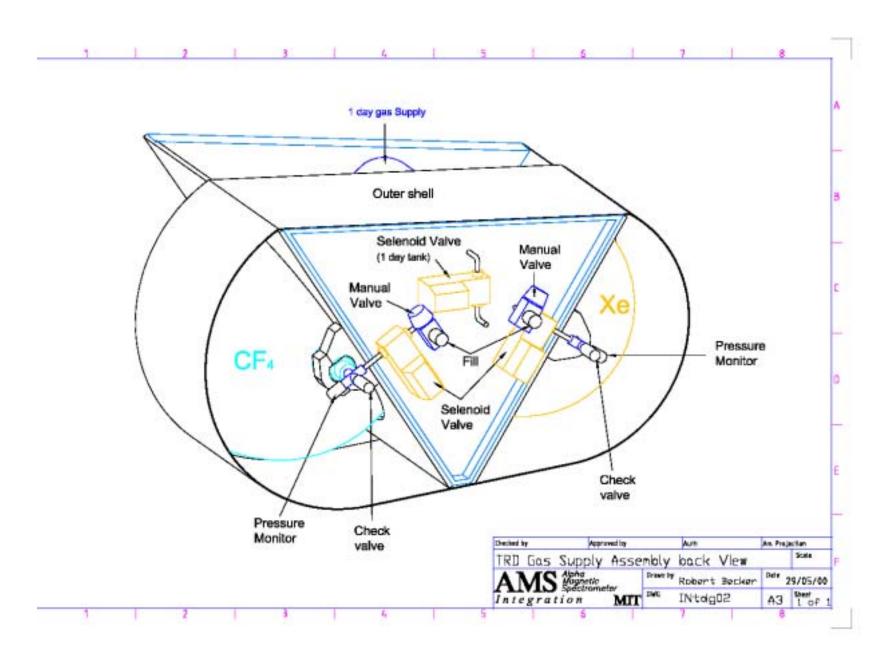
TRD Gas Supply Assembly (Back View)
